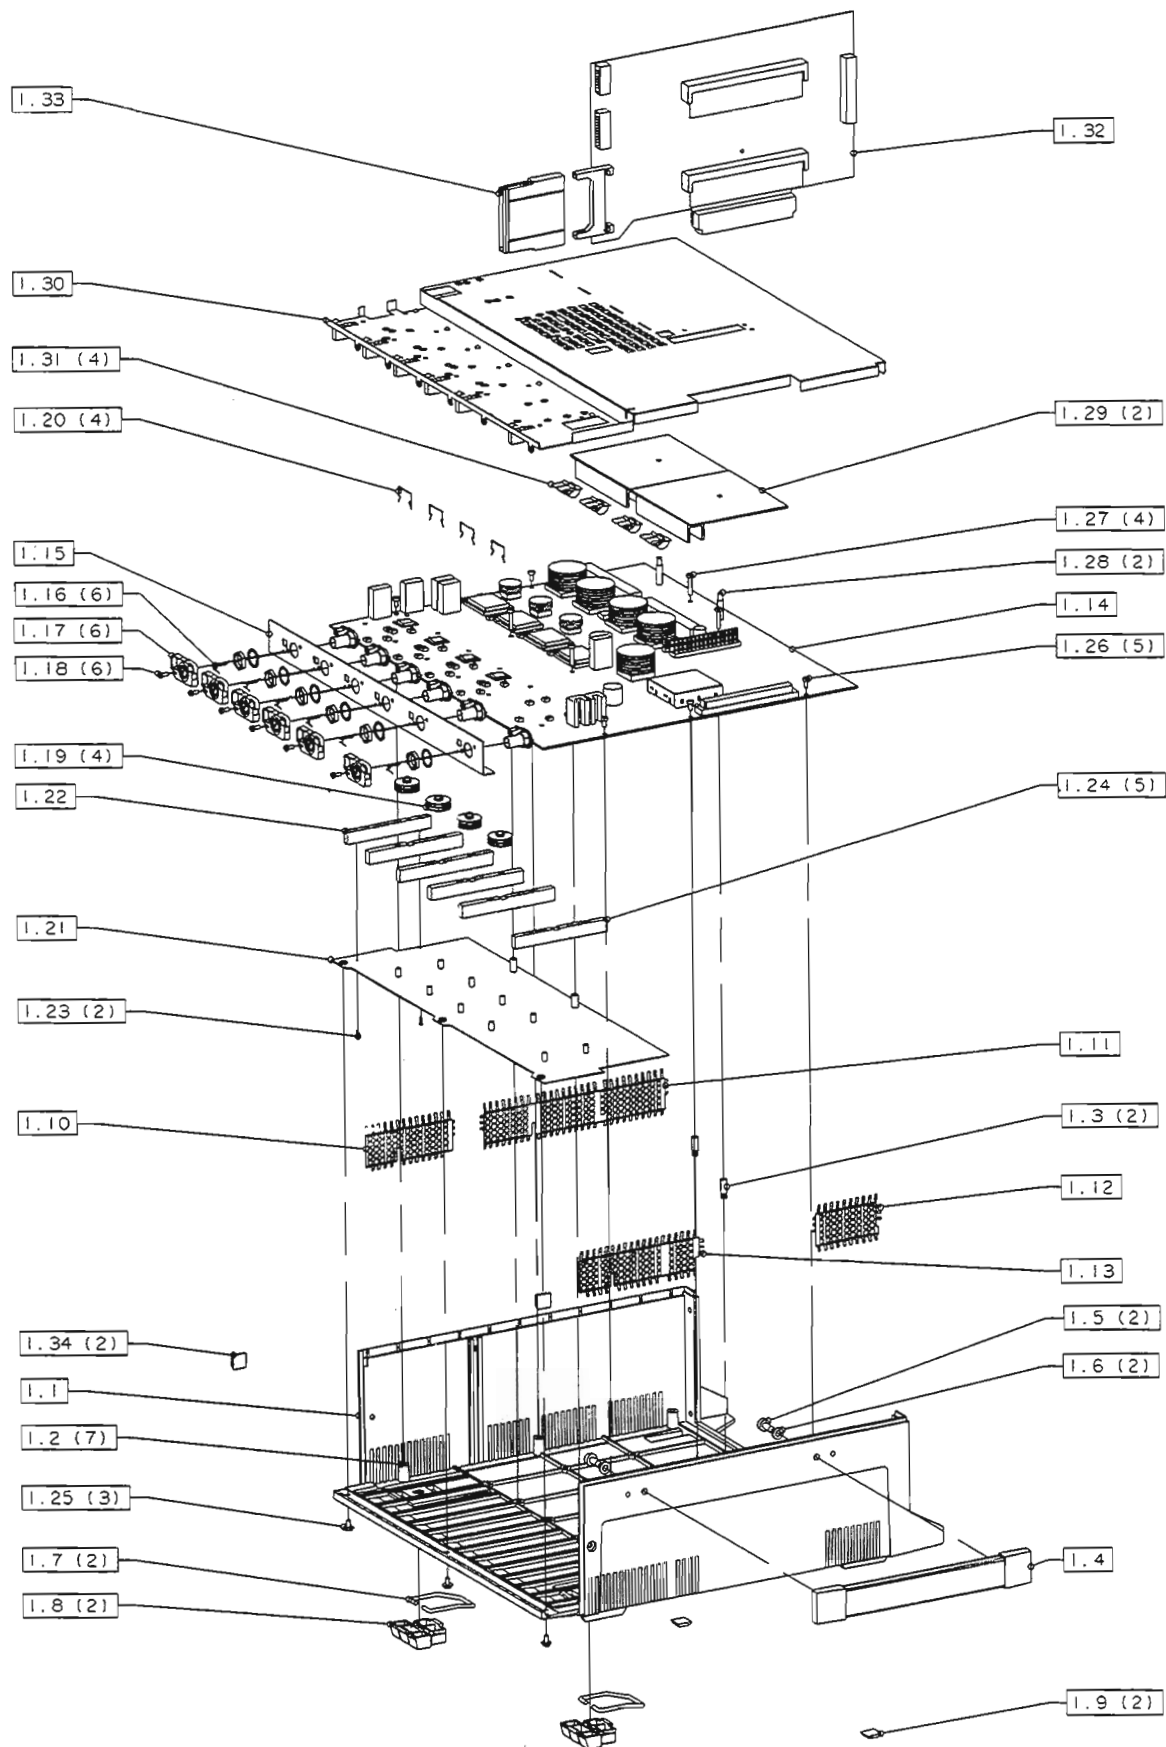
9374/M/L/TM Lower Cover Exploded View
